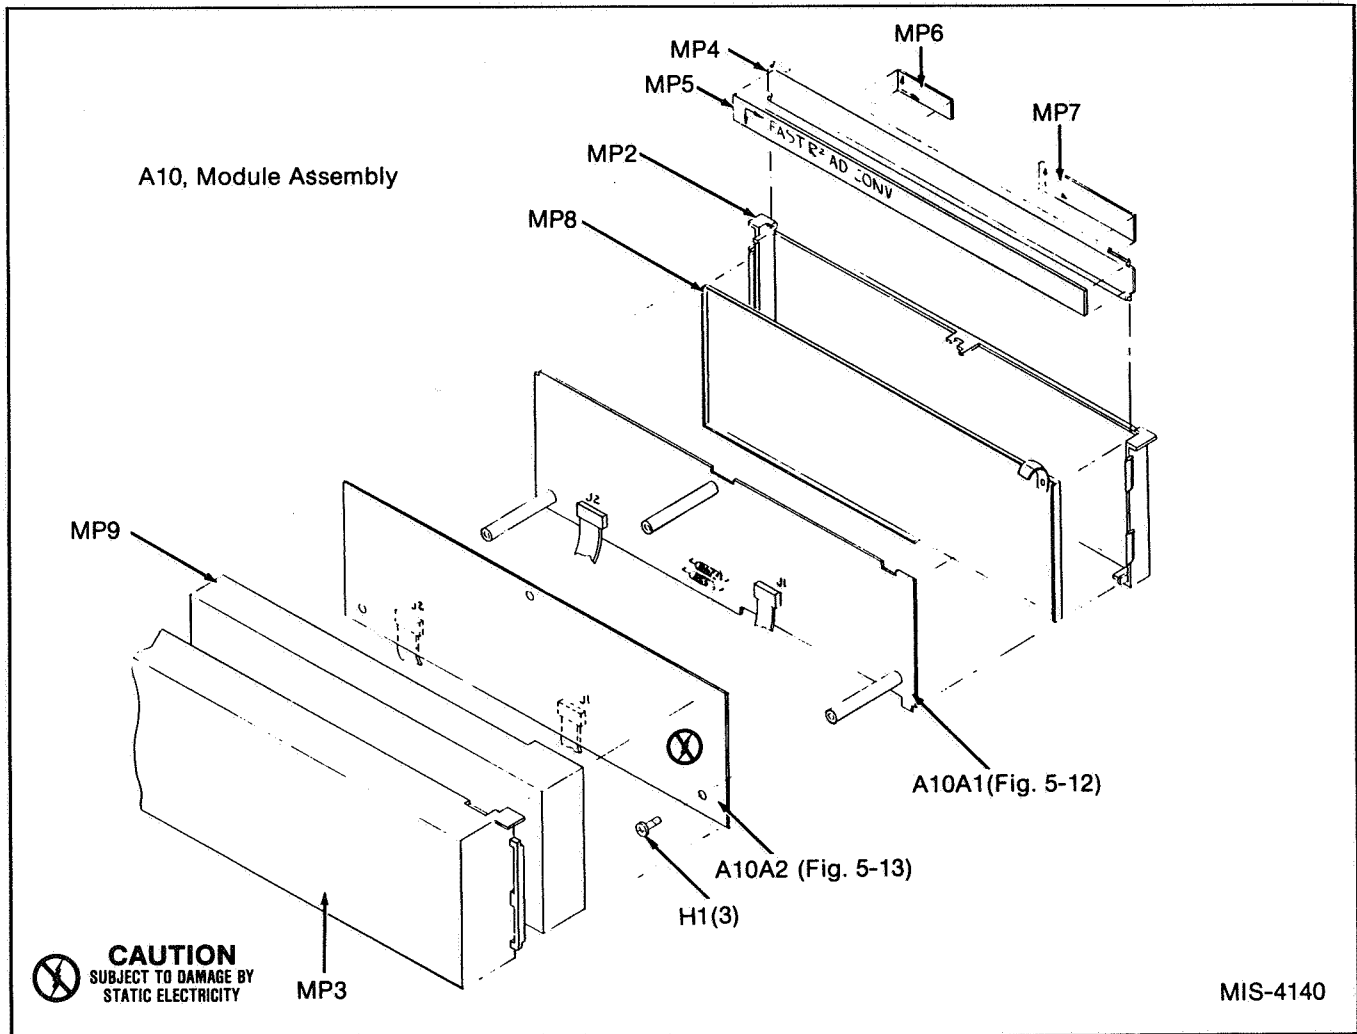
A10 Fast R2 A/D Converter Assembly
